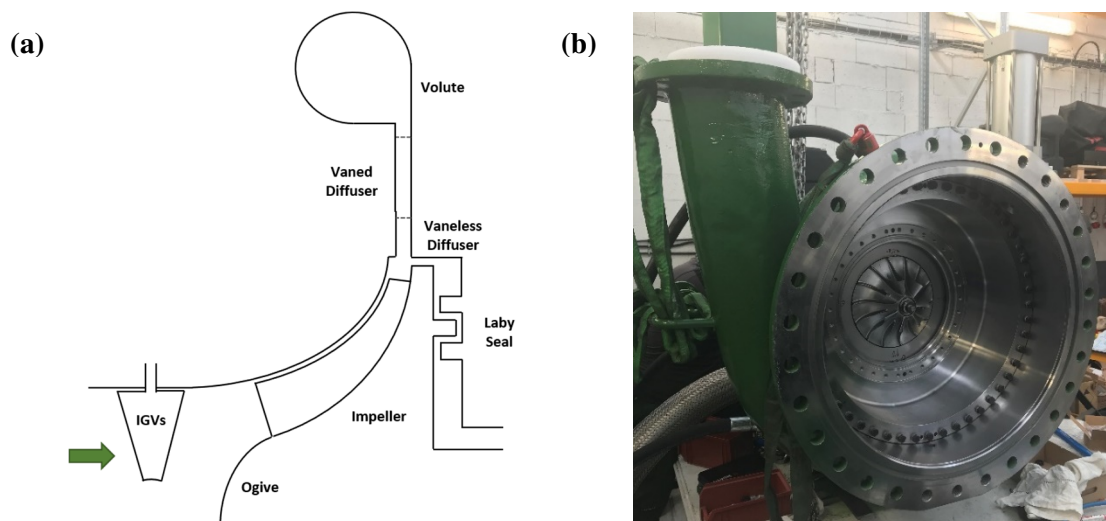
(a) Compressor configuration schematic; (b) Compressor photo during assembly
